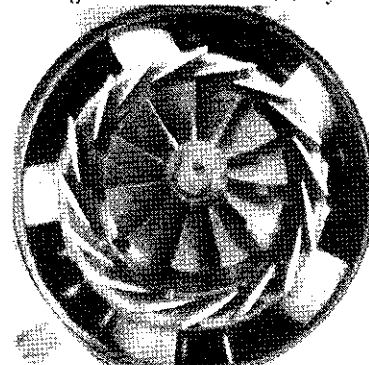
Ceramic Rotor and Inconel parts with TBC of type 4
